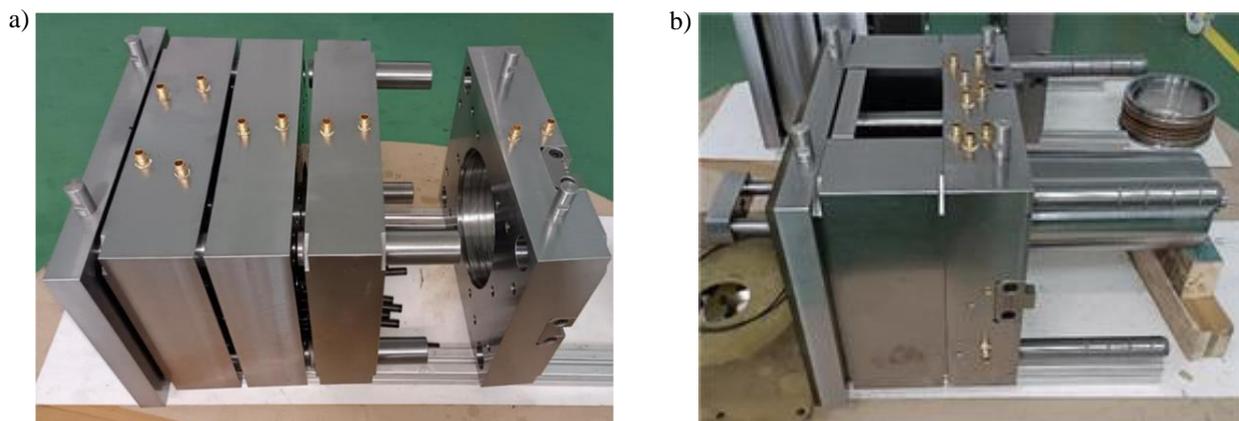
Modular injection mould with a conformal cooling channel for the production of hydraulic filter housings: a) die (during assembly); b) punch
